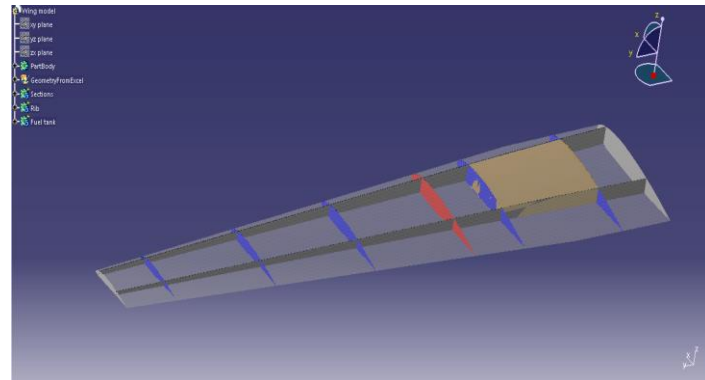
CATIA Drawing of the UAV Fuel Tanks.
